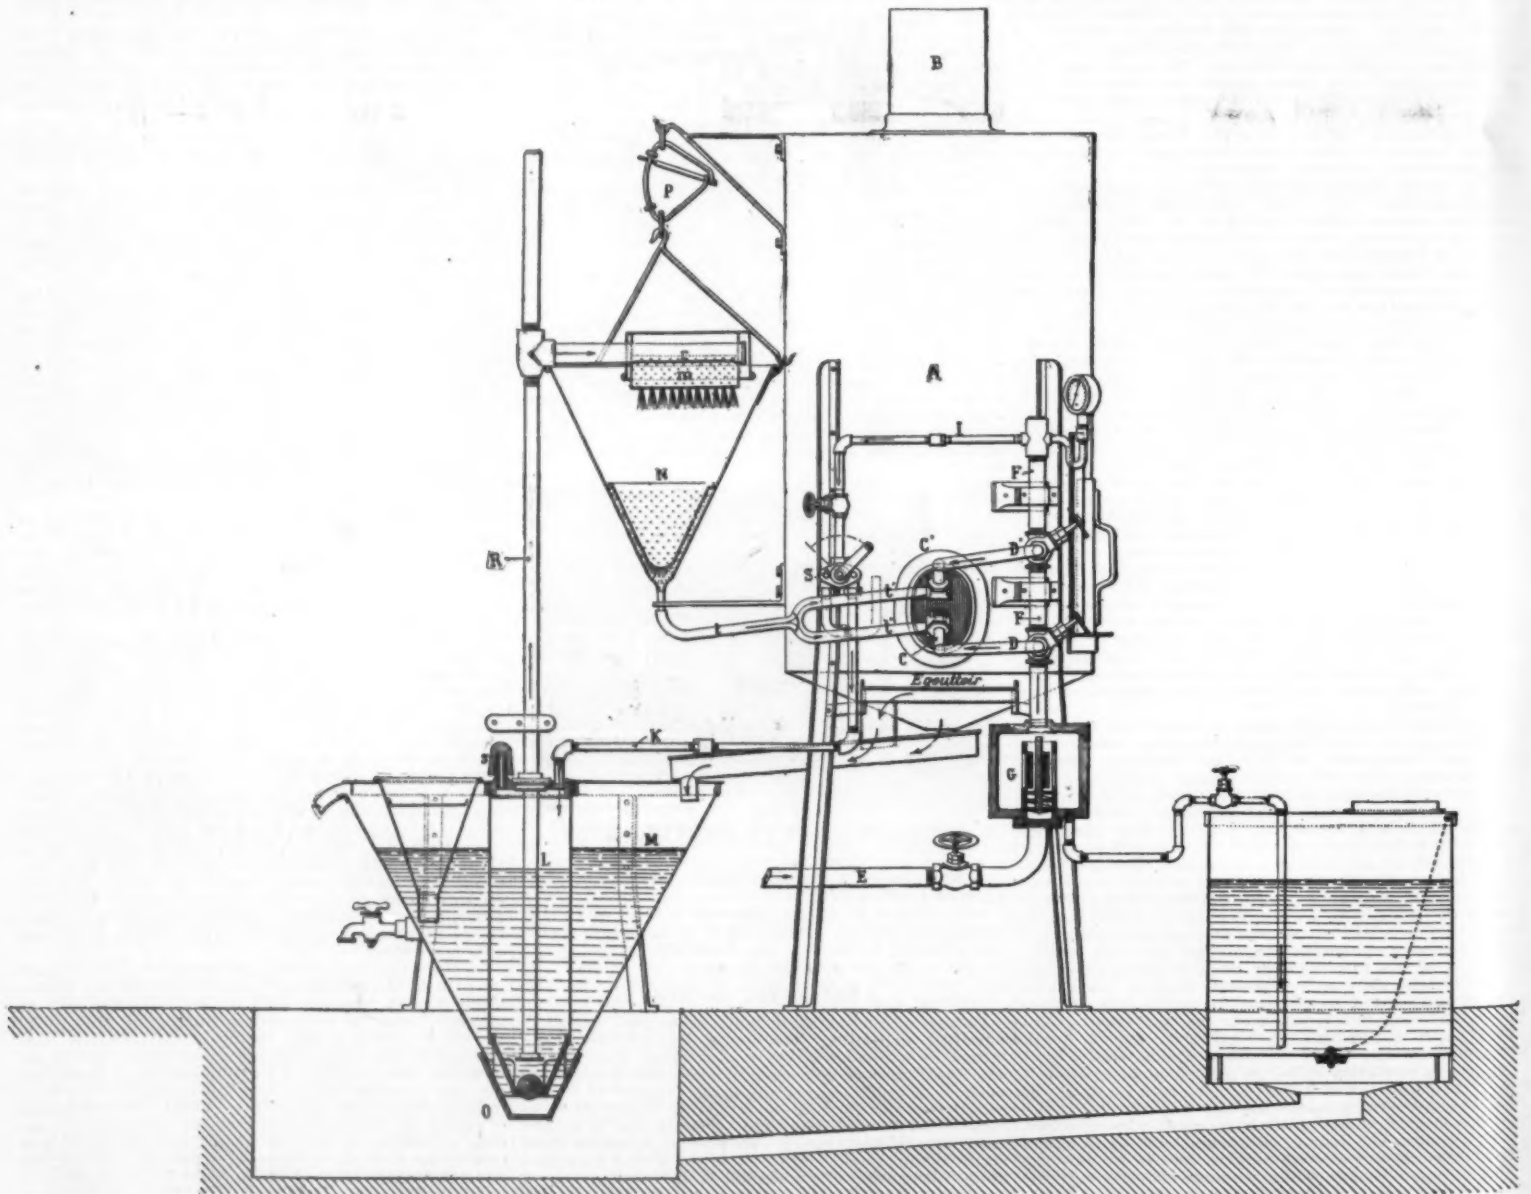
ELEVATION AND VERTICAL SECTION OF THE SAND BLAST APPARATUS.
